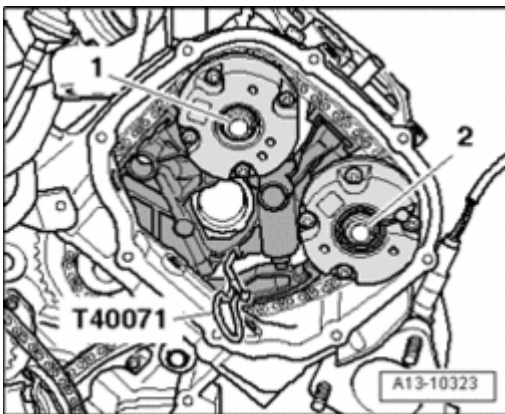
Identifying Bolts On Right Cylinder Head And Removing Both Camshaft Adjusters
